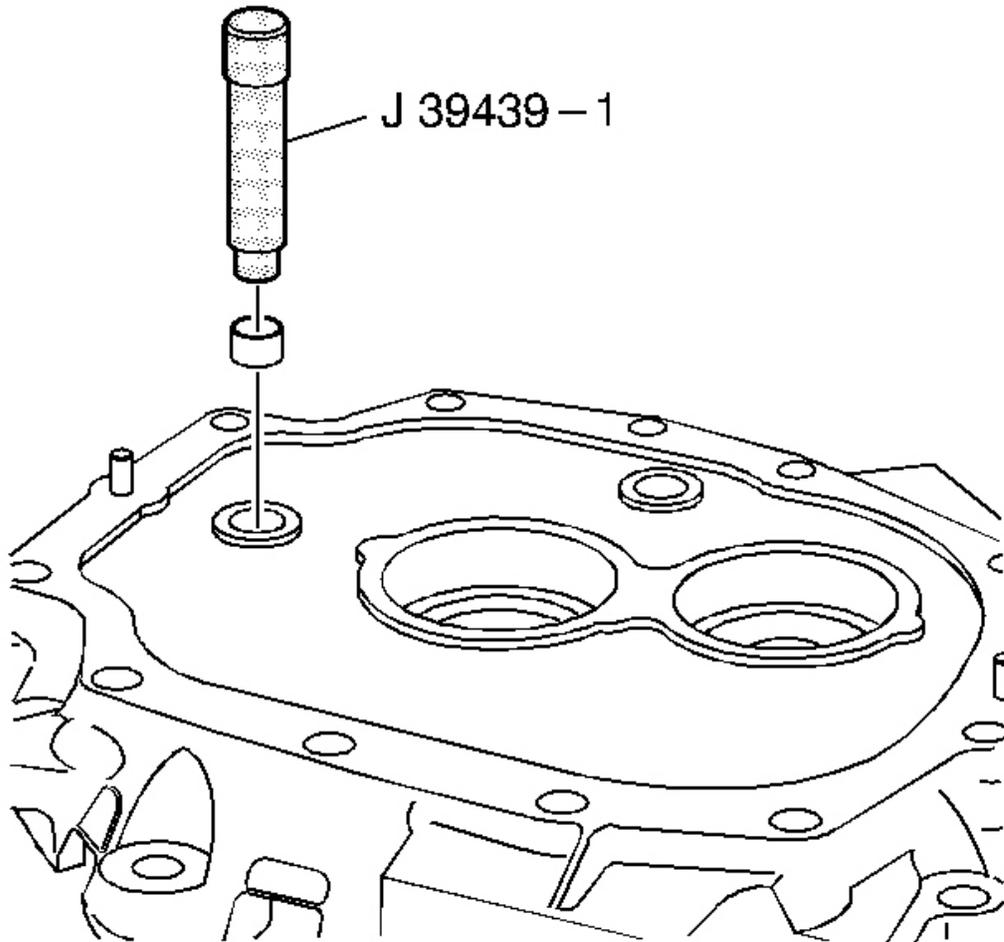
Installing 1st/2nd, 3rd/4th Speed Shift Shaft Bushing
